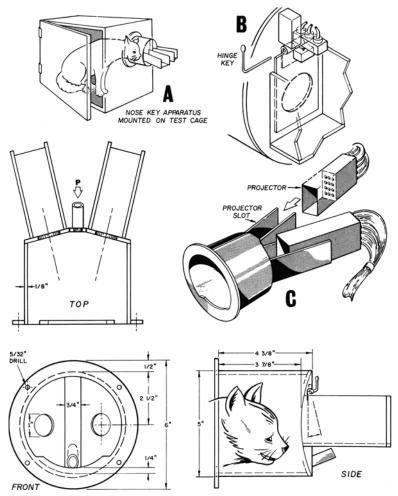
A-test chamber with test apparatus mounted on outside; B-rear view detail of nose-key showing quick-disconnect hinge; C-cradles for in-line projectors are shown mounted on the back of the test cylinder. The remainder of the figure lists the dimensions and shows construction details. All parts are made of Plexiglas and are cemented together with chloroform.
